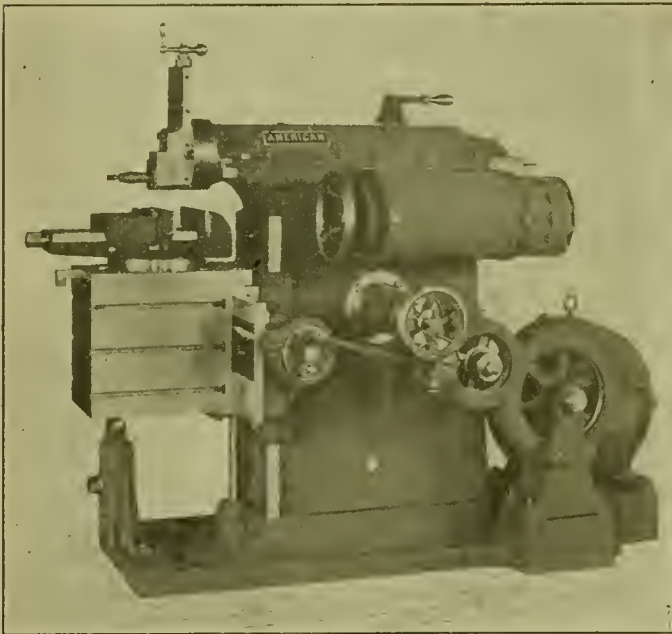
THE NEW "AMERICAN" SHAPER, SHOWING AN EXCELLENT APPLICATION OF MOTOR DRIVING.
